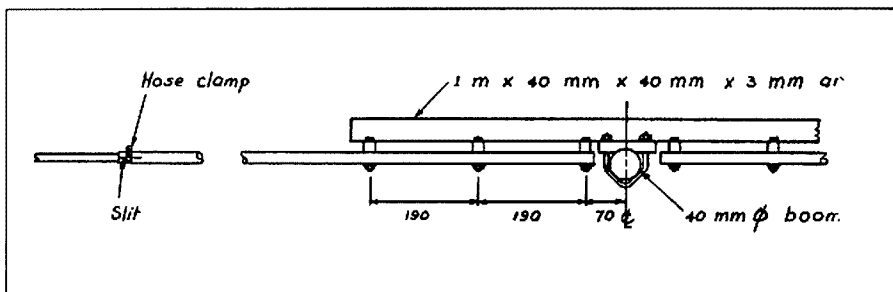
Construction Details. The angle is aluminium and clamped to the aluminium boom using standard TV antenna fittings. Each element consists of four lengths of aluminium tubing fitted together by using a hacksaw to make a slot in the larger tube, sliding the smaller tube inside about 75mm (3") and clamping with a stainless steel hose clamp. Element details: 22mm dia (7/8") 1.50m; 16mm dia (5/8") 1.30m; 12.5mm dia (1/2") 1.275m; 9.5mm dia (3/8") 1.185m. See figure 4 for details of element to angle mount.
